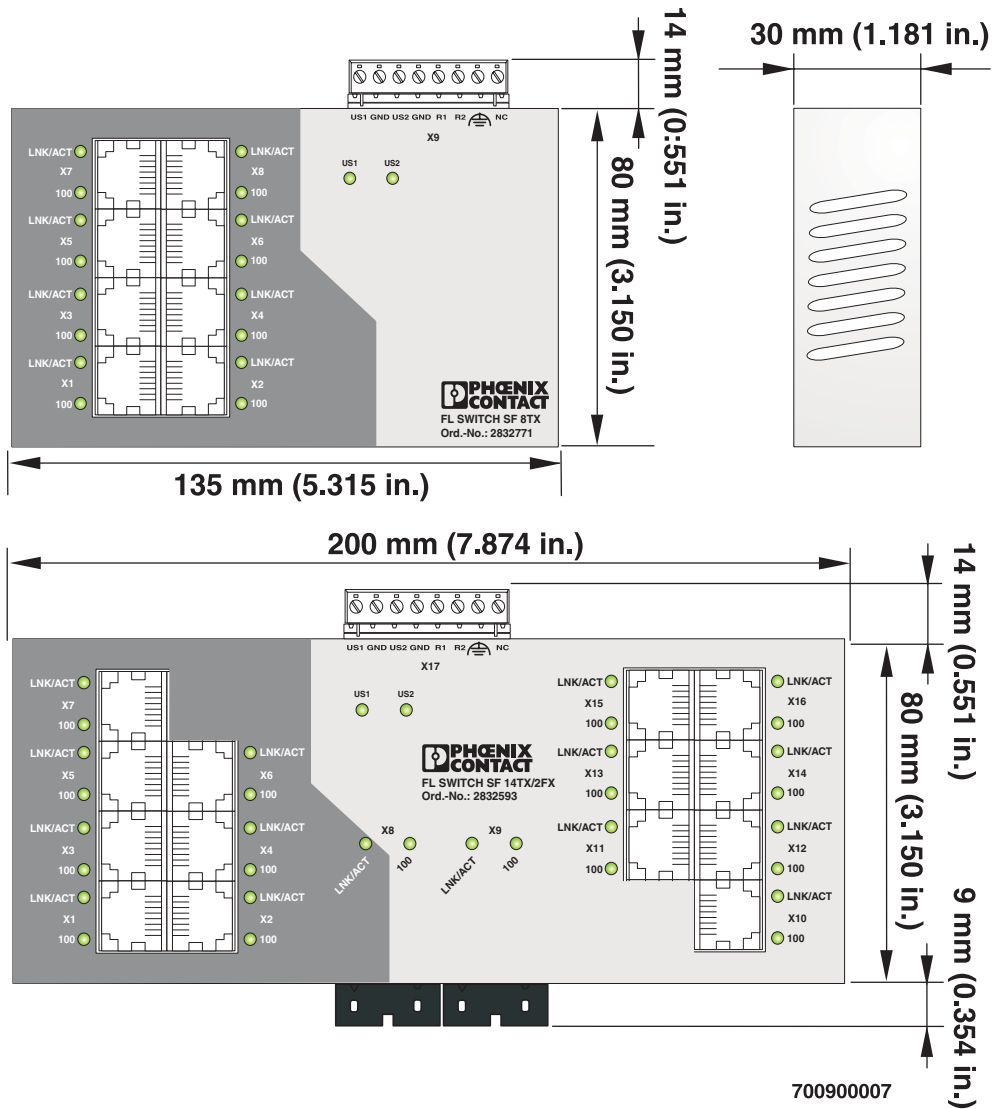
Housing dimensions of the FL SWITCH SF ... module
